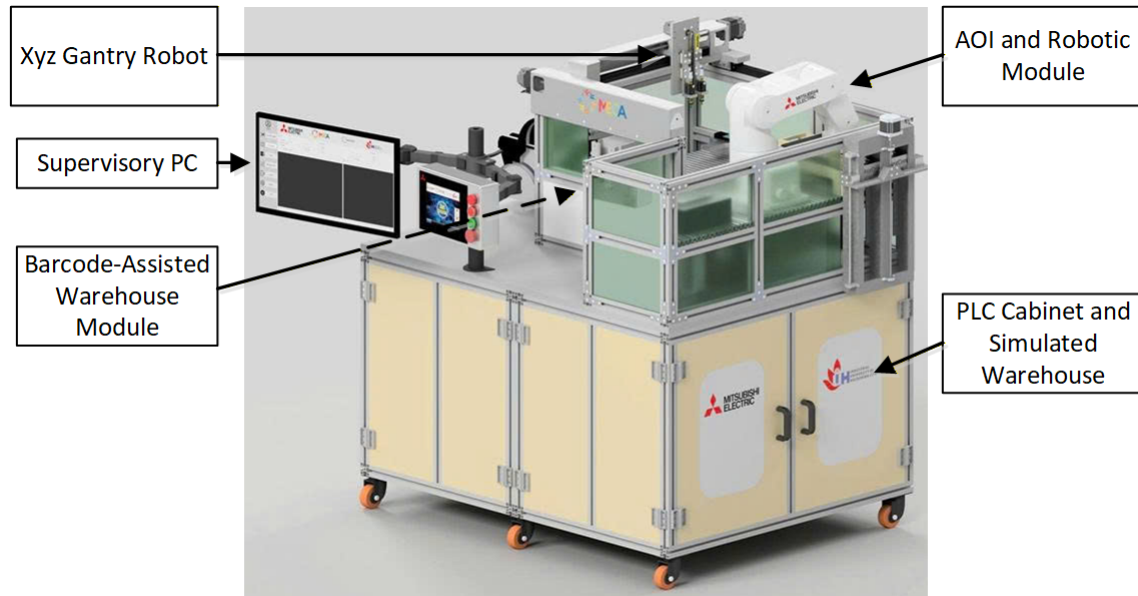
Three-dimensional front view of the laboratory-scale SMT assembly line (overall dimensions: 110 × 130 × 190 cm, width × length × height)
